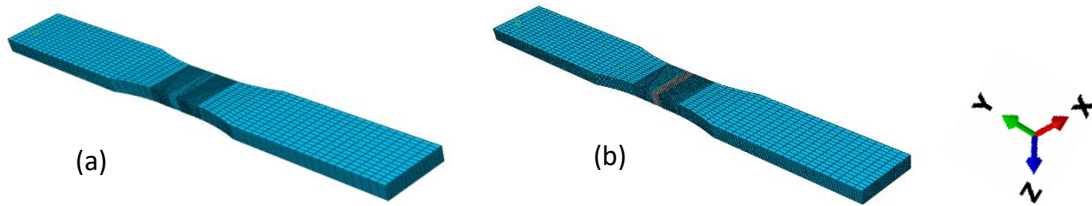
22 FE model of tensile test specimens: (a) Base metal and (b) Welded metal.
